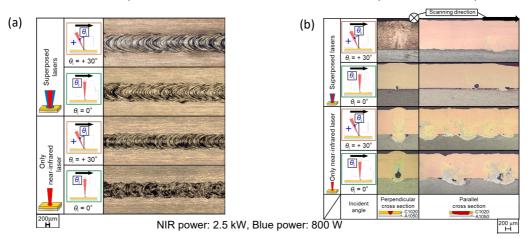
Welding results. (a) appearances of weld bead; (b) cross section owe weld bead
